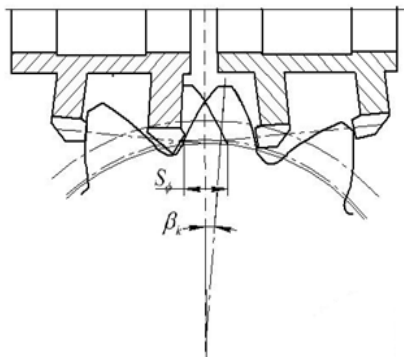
Installing and adjusting the cutter when turning the wheel at an angle β_k
